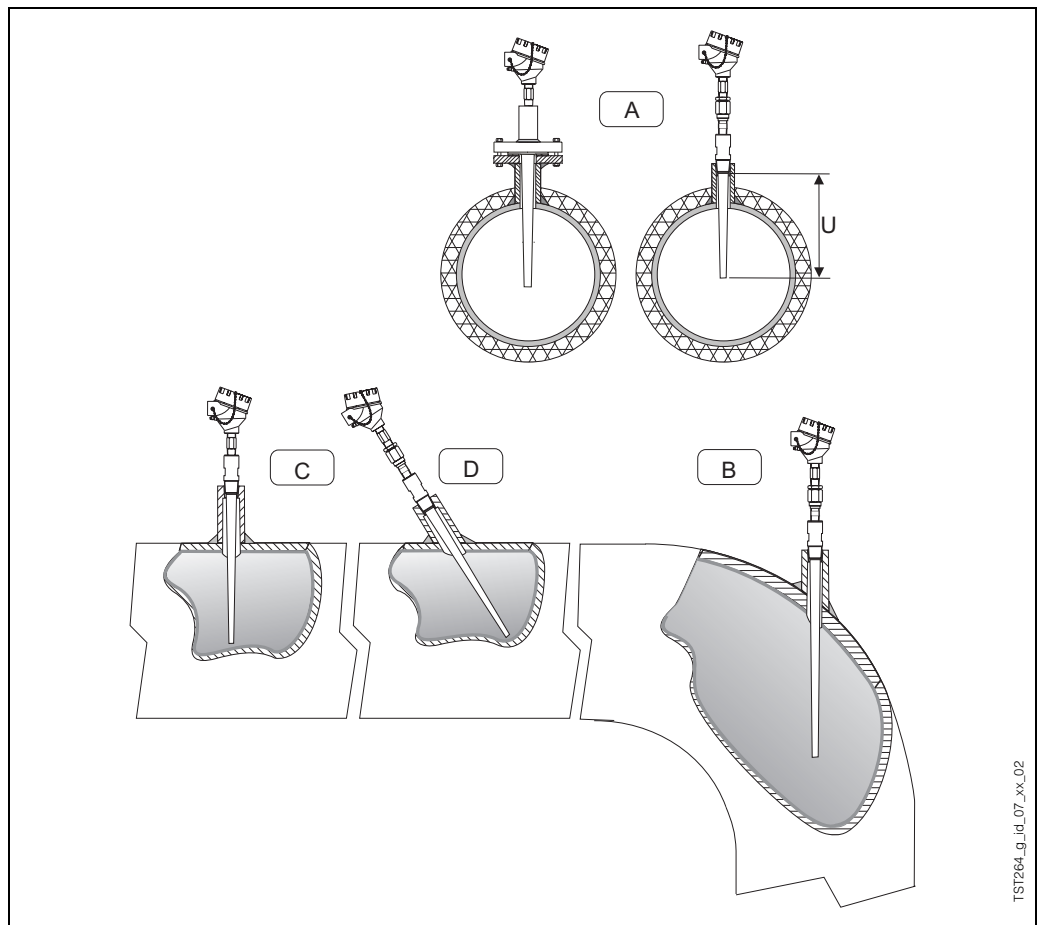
Installation on pipes and tanks by means of flanged or threaded process connections
